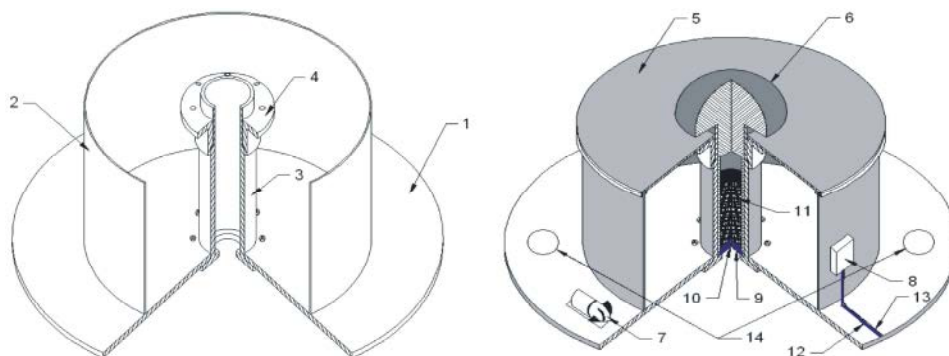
Unit layout: 1 – bearing frame, 2 – spherical shell, 3 – shaft, 4 – joint, 5 – cover, 6 – ice crushing tool, 7 – engines, 8 – control block, 9 – PU closing plug, 10 – spark gap, 11 – powder, 12 – air pipeline, 13 – control cable and power cable, 14 – video cameras.
